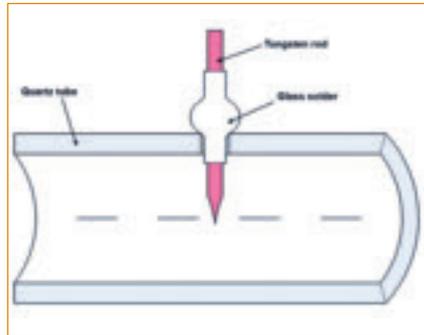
Cross section of the glass tube showing the position of the tungsten rod and glass bead prior to soldering in place.
